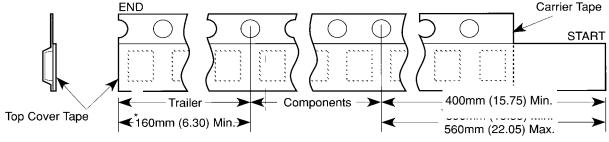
Tape Leader & Trailer Dimensions (Metric Dimensions Will Govern)
